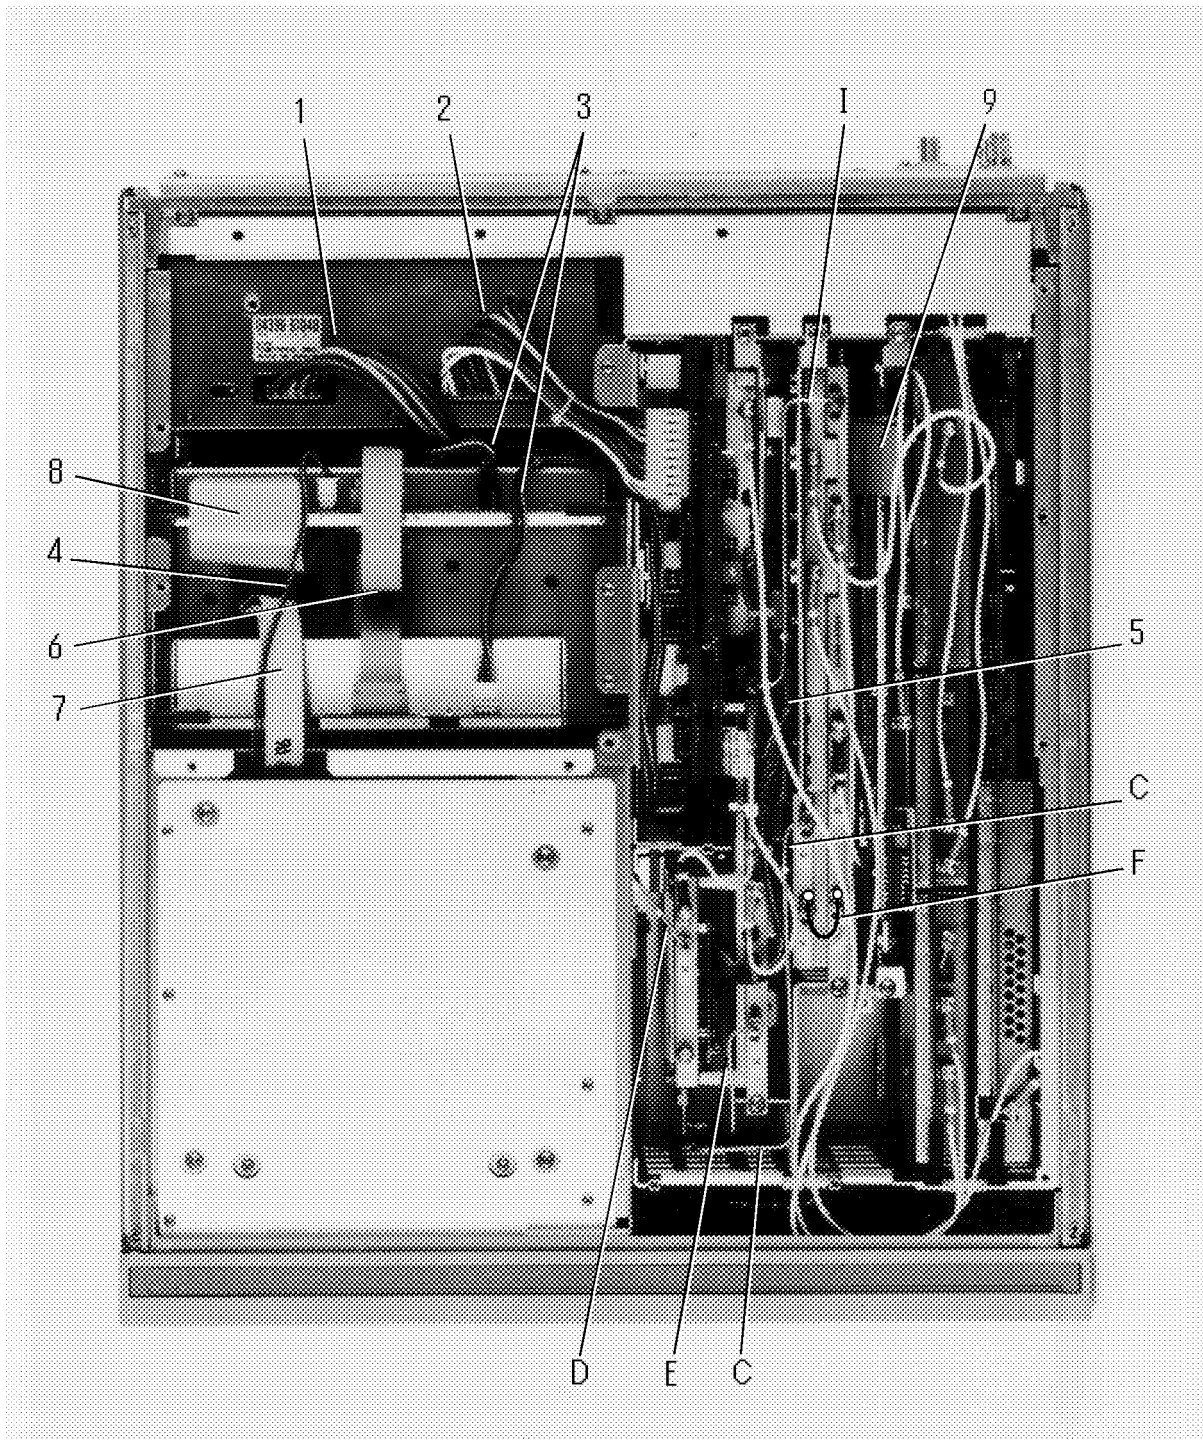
Top View 3 (RF Semi-rigid Cables, and Wires)
